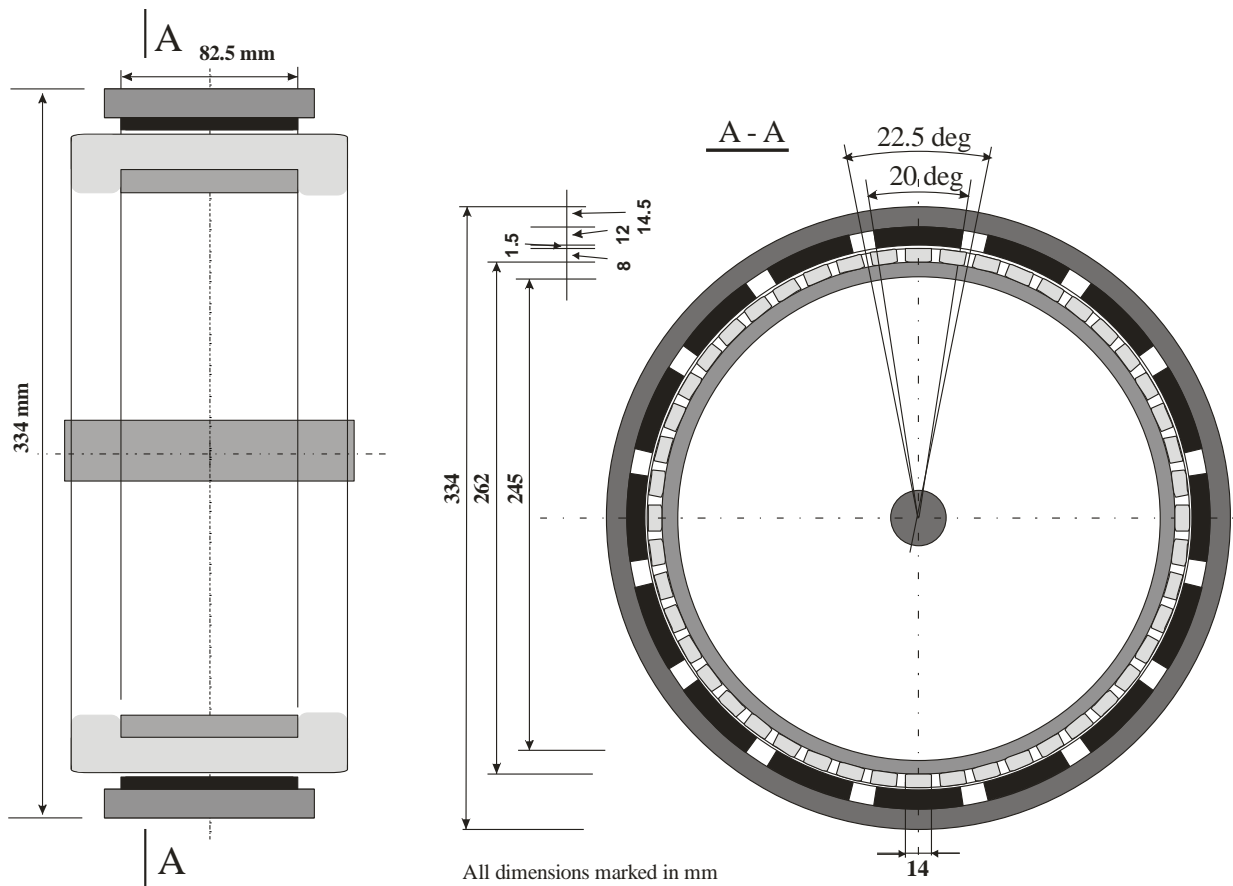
Schematic of single rotor RF PMBL motor with slot-less stator
